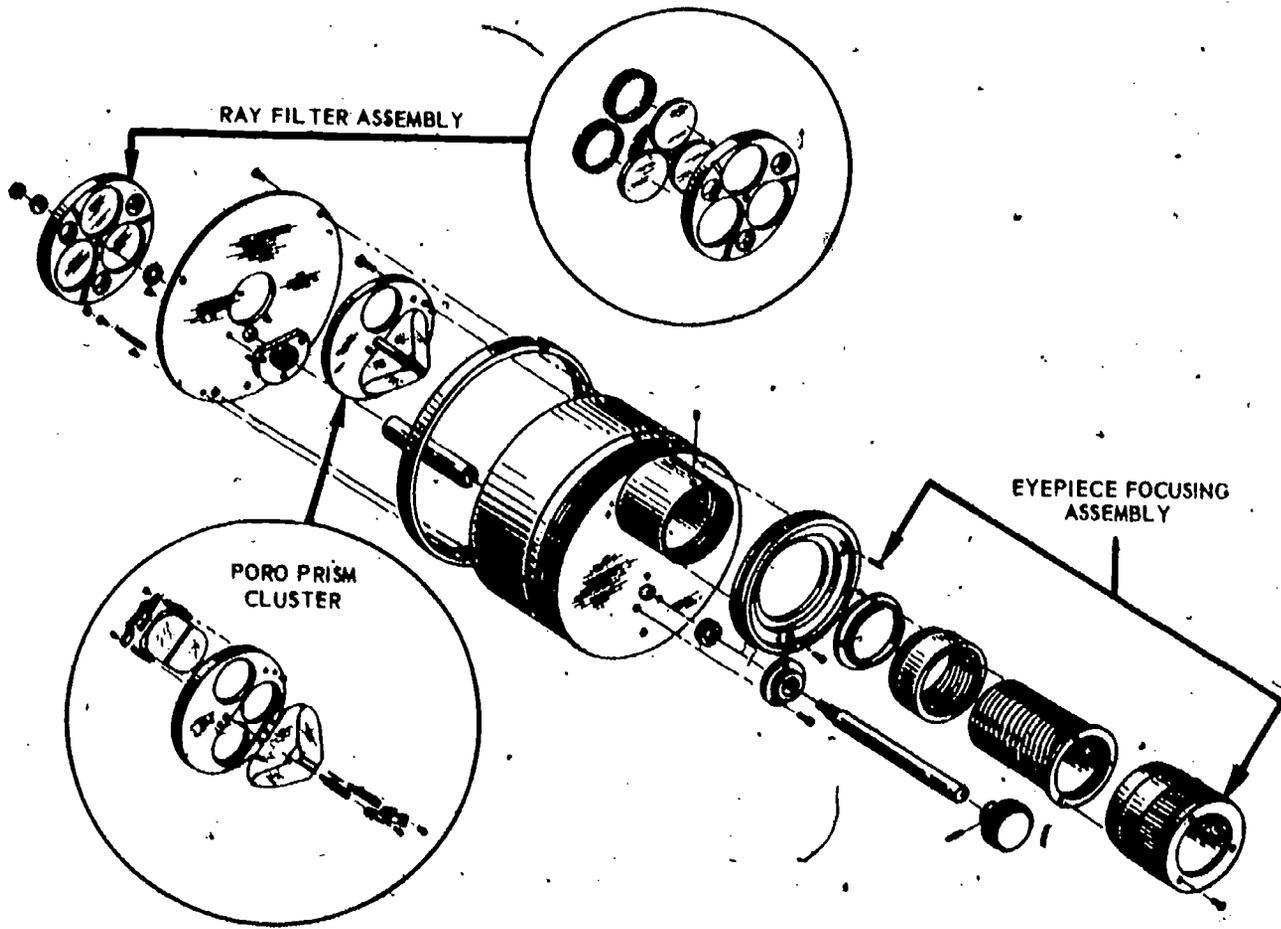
Prism box, filter, and eyepiece focusing assembly—exploded view.
